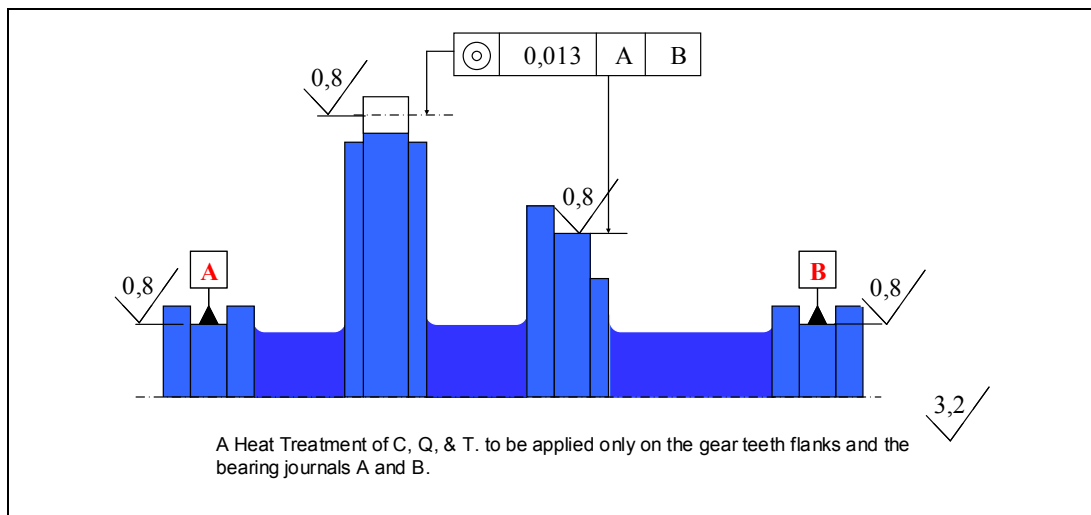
Typical gear-shaft for an aerospace engine (the condition of concentricity of 0.013 mm could be implemented through a proper process plan sequence)
